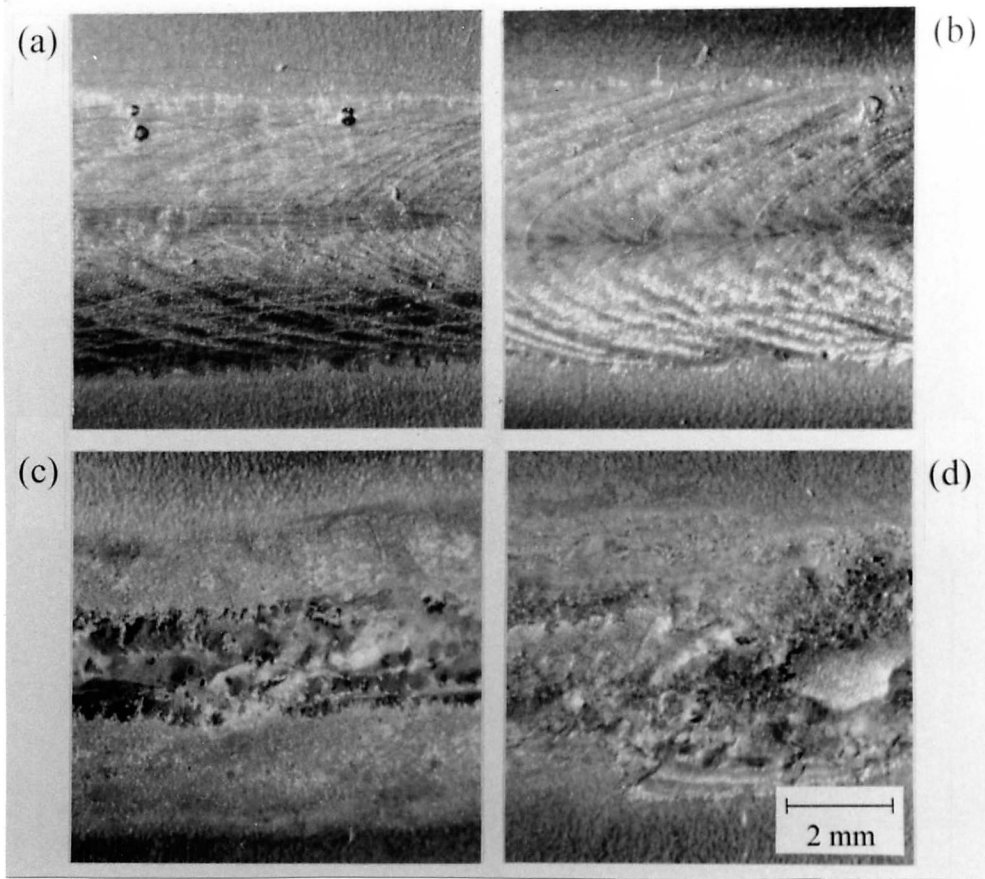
As-welded surfaces of E1-E4.
